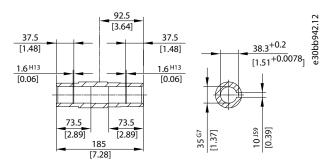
Steel/Stainless Steel 35 mm Shaft
